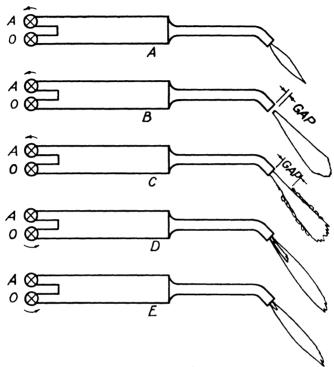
Lighting the torch: A. Acetylene valve just open and a small acetylene flame, B. Acetylene valve opened until acetylene will jump away from and back to tip, C. Alternate method of adjusting for the combustion of acetylene, turbulence must be about ¾" to 1" away, D. Oxygen being slowly turned on, E. Oxygen turned on until neutral flame is obtained
